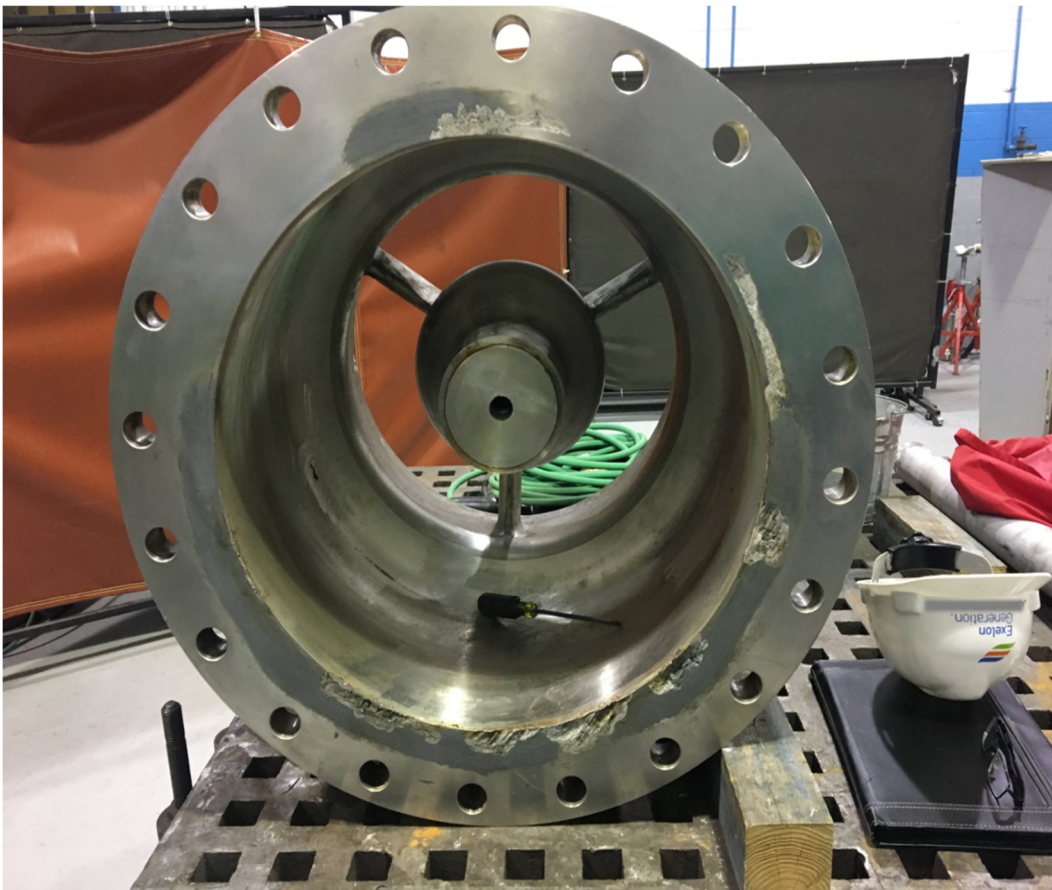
Seawater corrosion of a sea water check valve flange at a nuclear power plant (courtesy Exelon).
